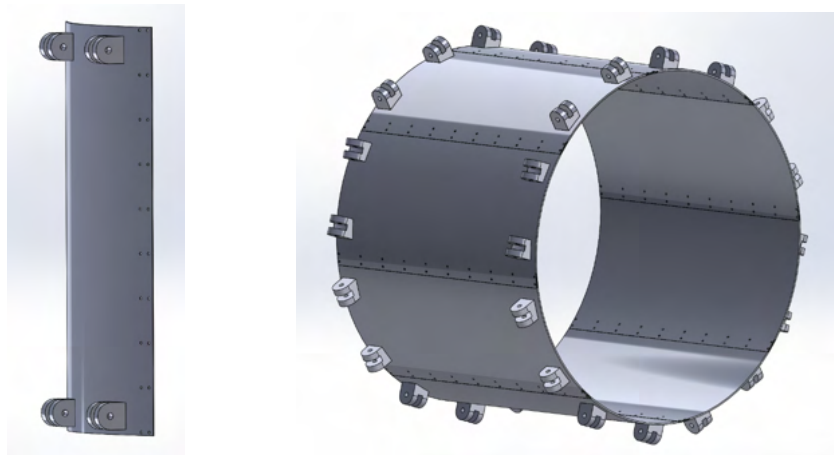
Initial mounting design for base plate (left) and assembly of 8 base plate structures (right).
